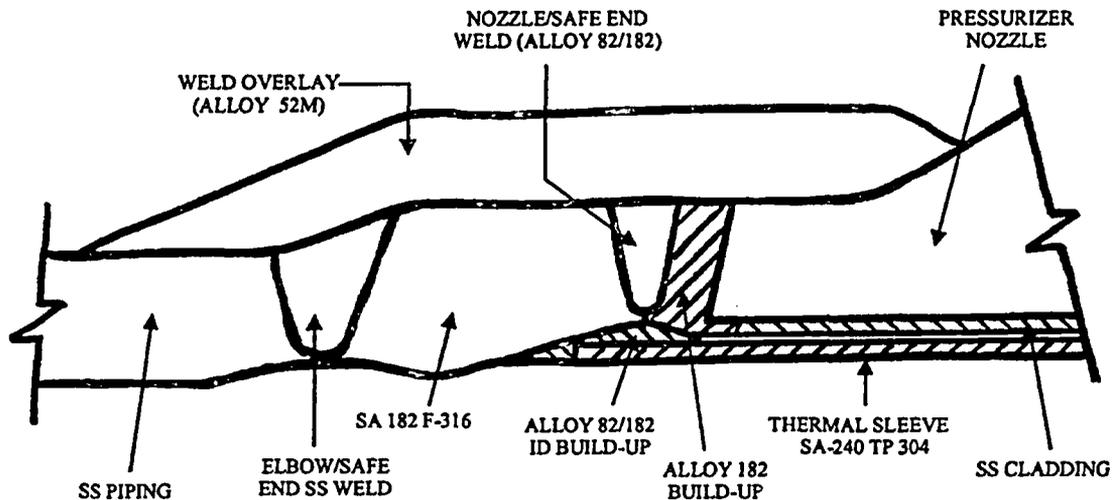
General Configuration for Pressurizer Nozzle and Welds with Applied Full Structural Weld Overlay
